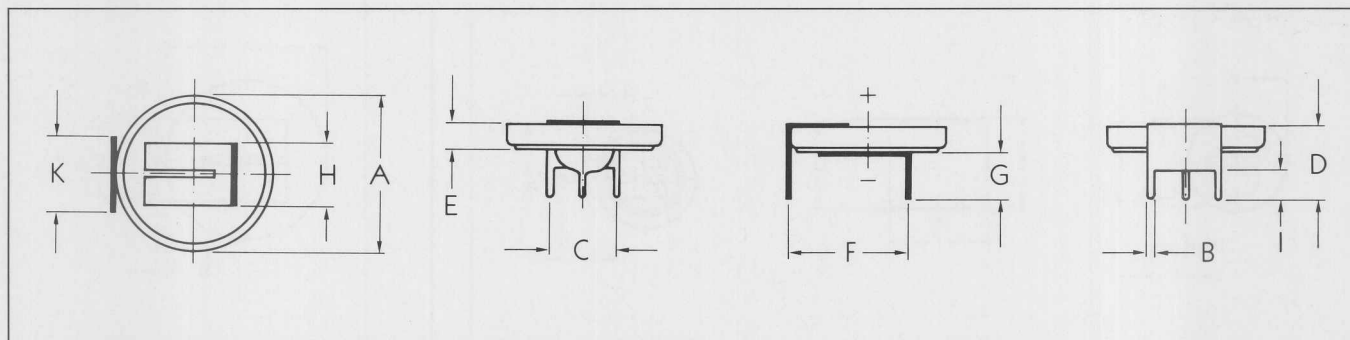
Drawing of PCB design (with flat pin solder tags)
